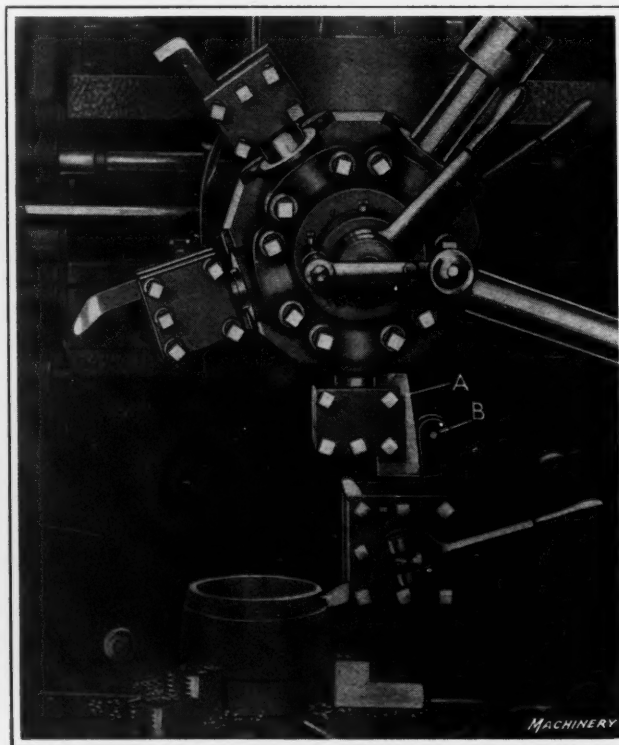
Method of machining a Taper Surface by using a Special Taper Cam in the Main Turret
